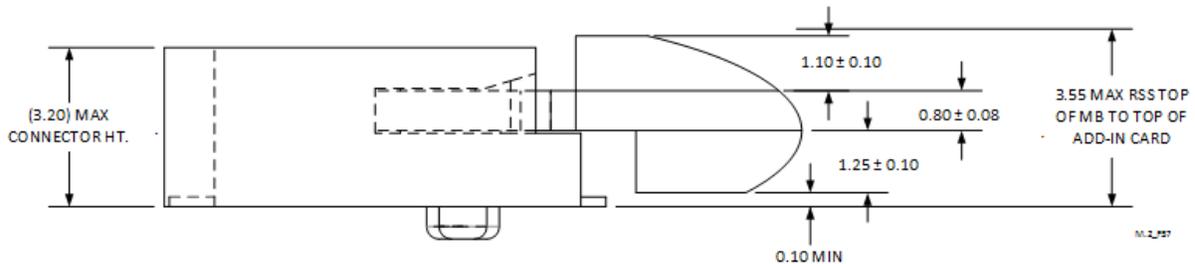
H3.2-D1 – Stack-up Top Mount Double-sided Add-in Card for 1.20 Maximum Top-side Component Height
